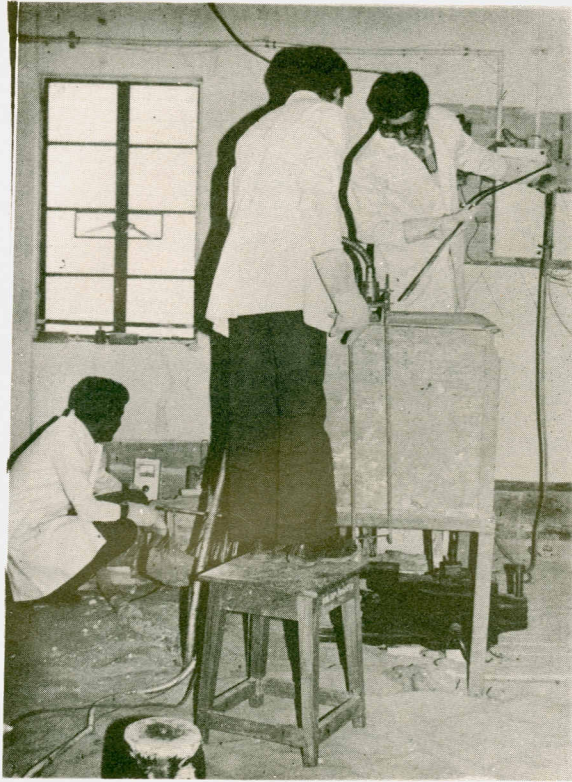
A proto-type bottom pouring furnace for making cast metal/ceramic particulate composites with a Piston die at the bottom.
